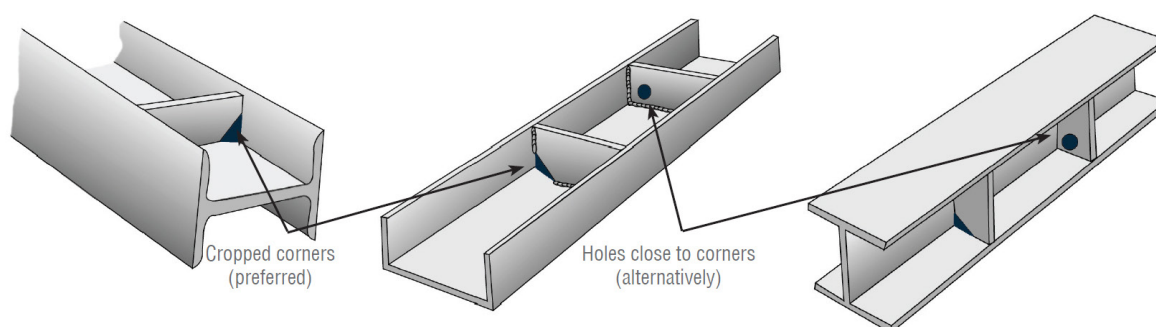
EXAMPLE VENTING AND DRAINAGE OF STIFFENERS
